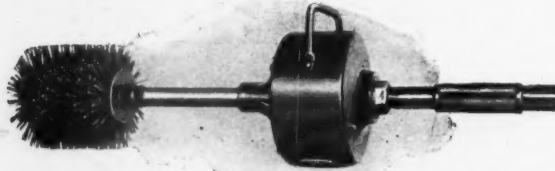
A PNEUMATIC SCRATCH BRUSH FOR CLEANING CASTINGS.
